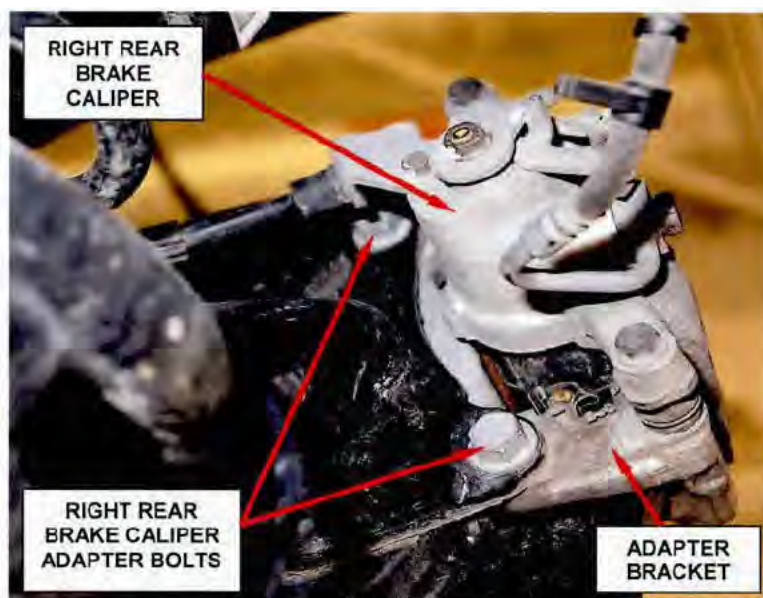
Right Rear Brake Caliper Adapter Bolts
